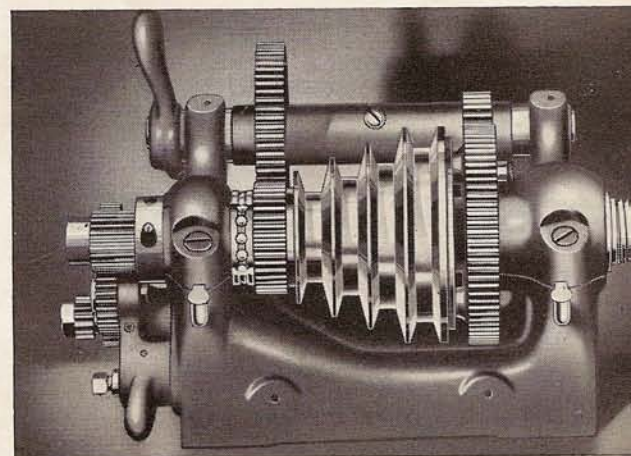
Headstock of 9-inch "Workshop" Lathe (with Gear Guards Removed) Showing 4-Step Cone Pulley for V-Belt Drive
